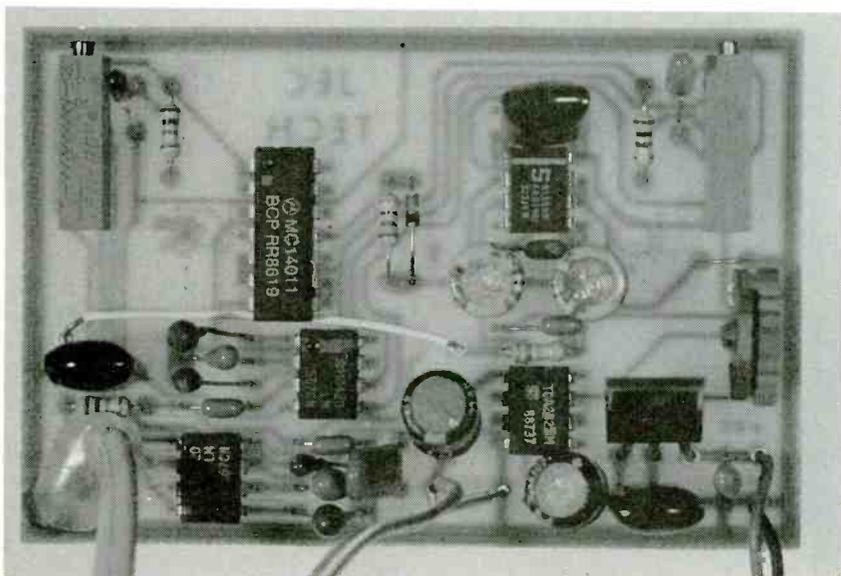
COMPLETED CIRCUIT BOARD showing wiring to power jack, speaker and telephone plug.
